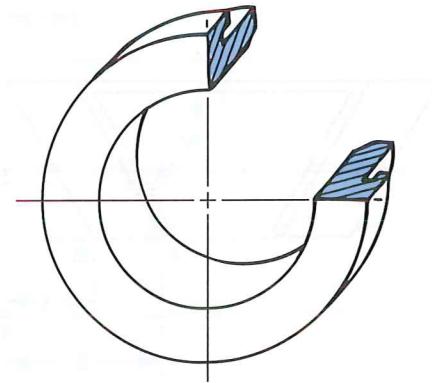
Oblique half section views are sometimes used to show interior details. The half section is most often used because the full section usually does not show enough exterior detail.
